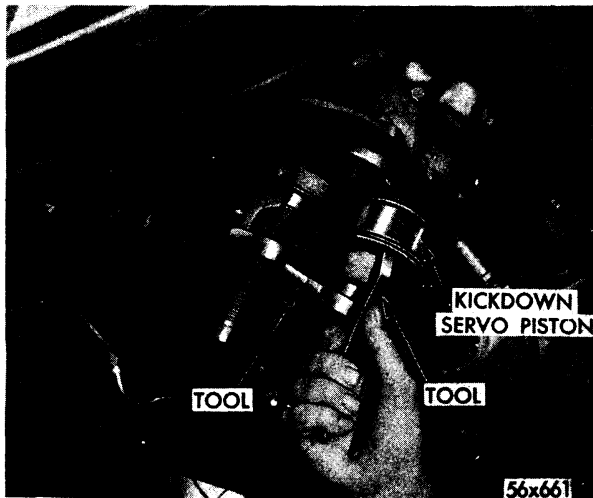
Removal and Installation of Kickdown Piston (Typical View)
